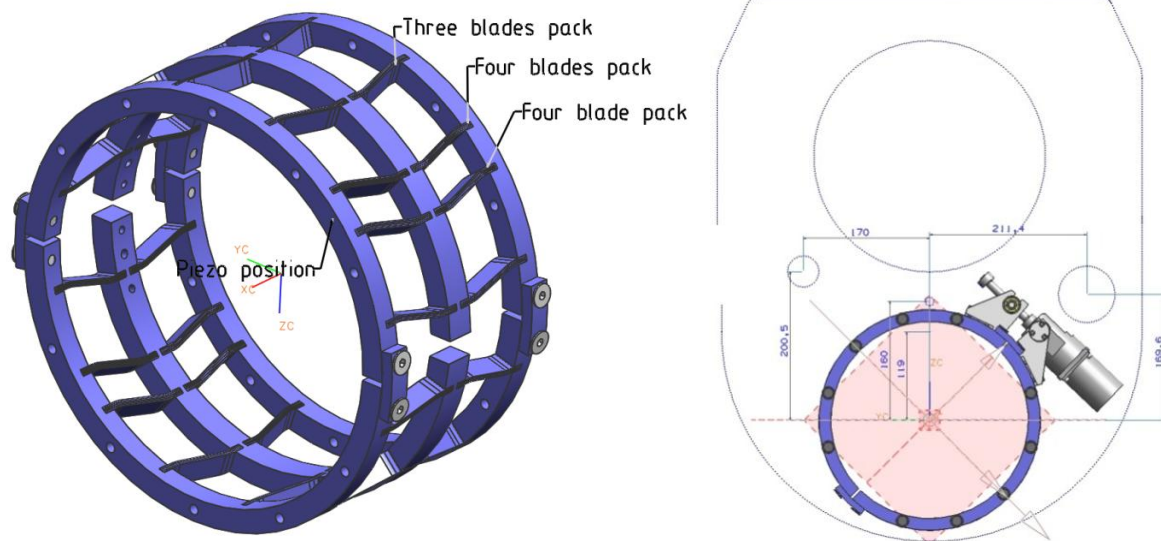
The final Blade Tuner design (left) and its revised positioning inside the cryomodule
